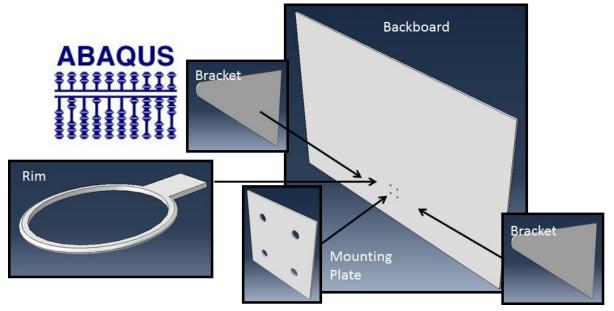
Assembly of basketball hoop build in Abaqus/CAE. Parts of the assembly include the rim, the backboard, the front mounting plate, and two side brackets.
